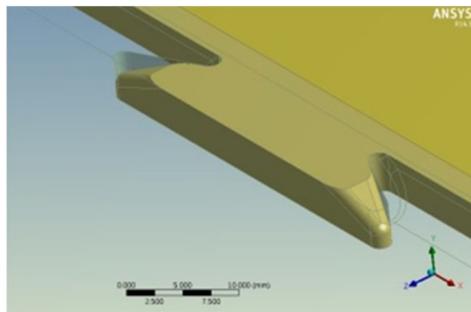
Illustrating upper side view of empty spaces of dovetail joint
